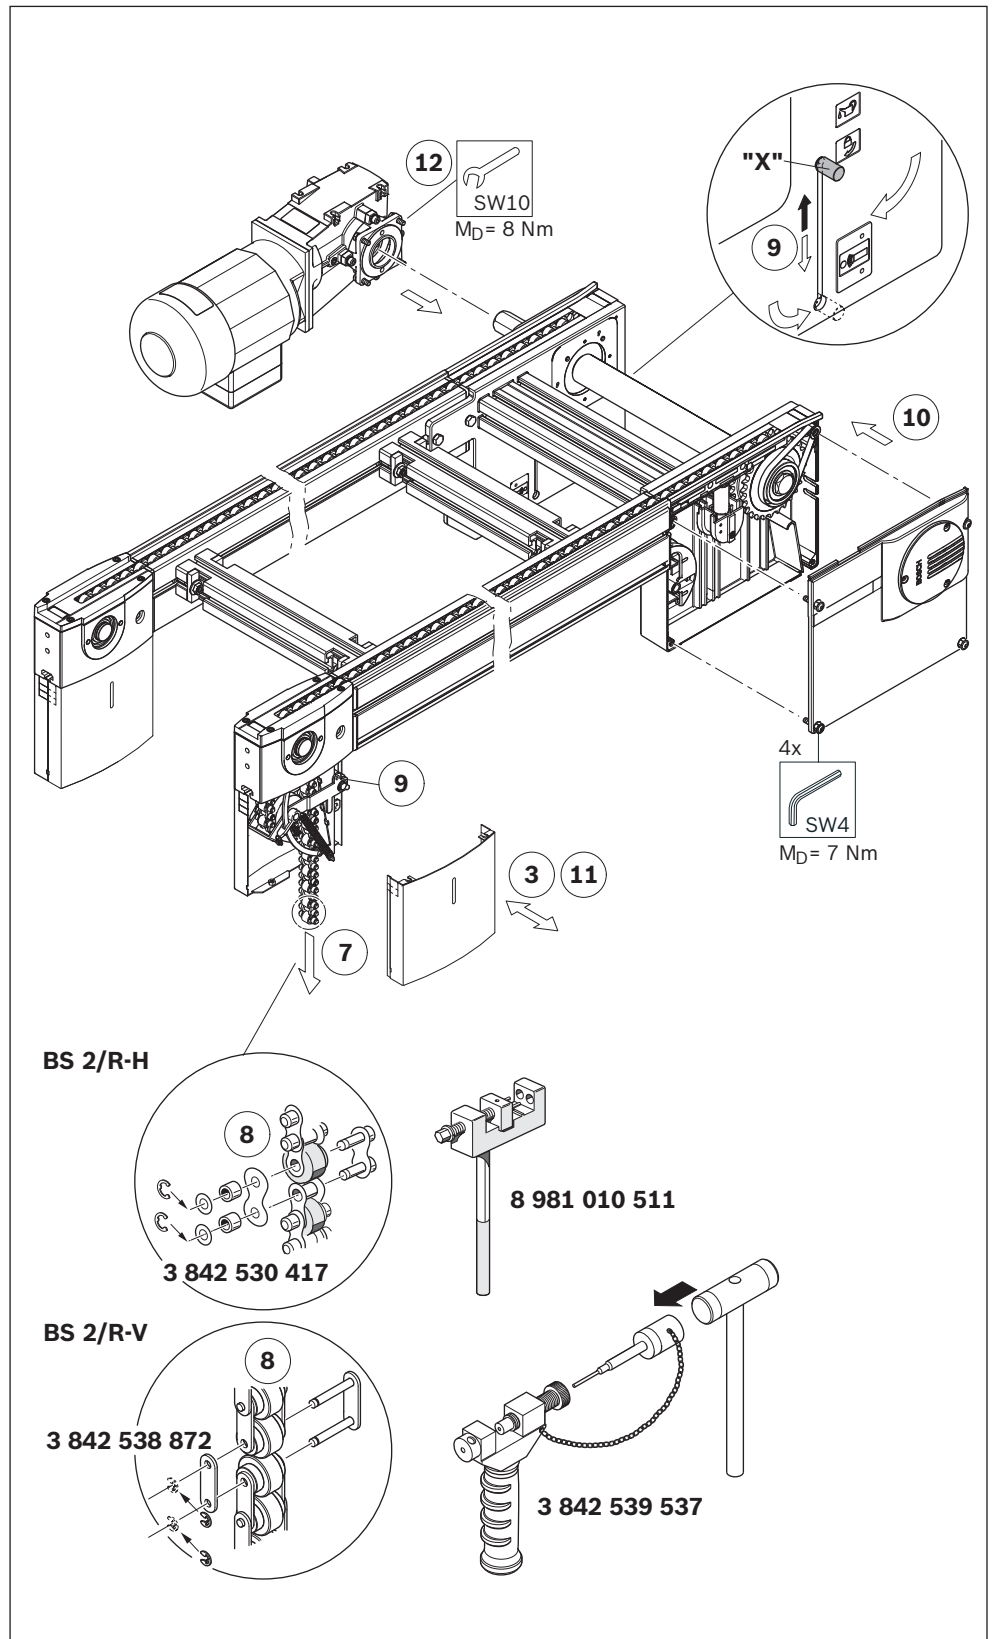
Shortening the conveyor chain BS 2/R-H, reversible, BS 2/R-V, reversible (2/2)
